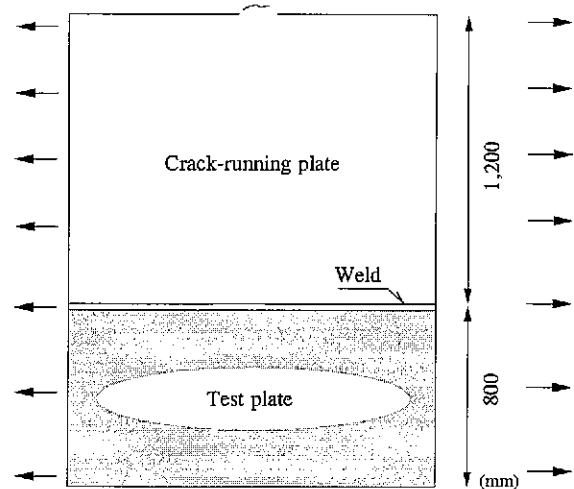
Type I ultrawide-plate duplex ESSO test specimen
